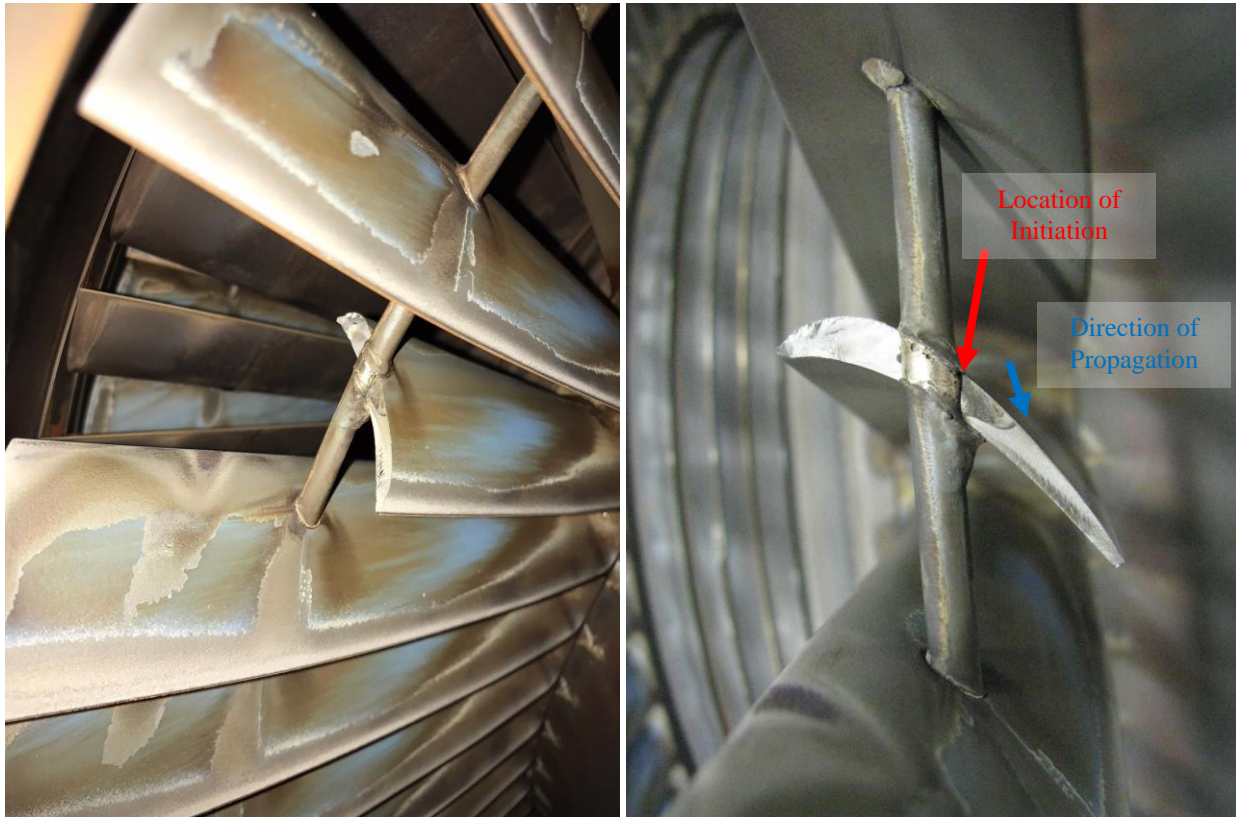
Fatigue Failure of Steam Turbine Blade
